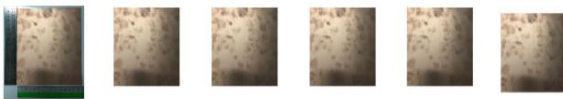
PCB size 6× 6.5 inches before corrosion.
